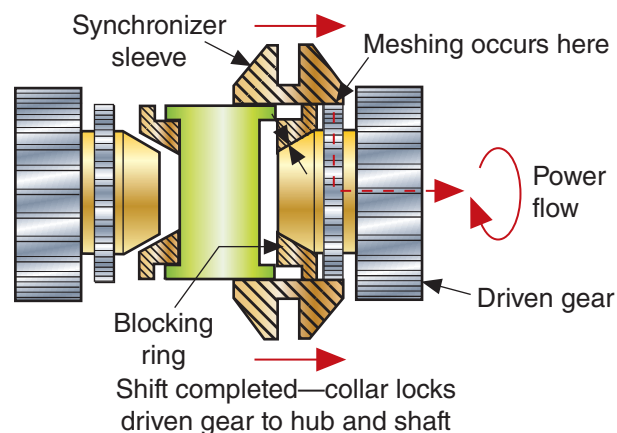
Gear shoulder and blocker ring mating surfaces when a gear is engaged.
